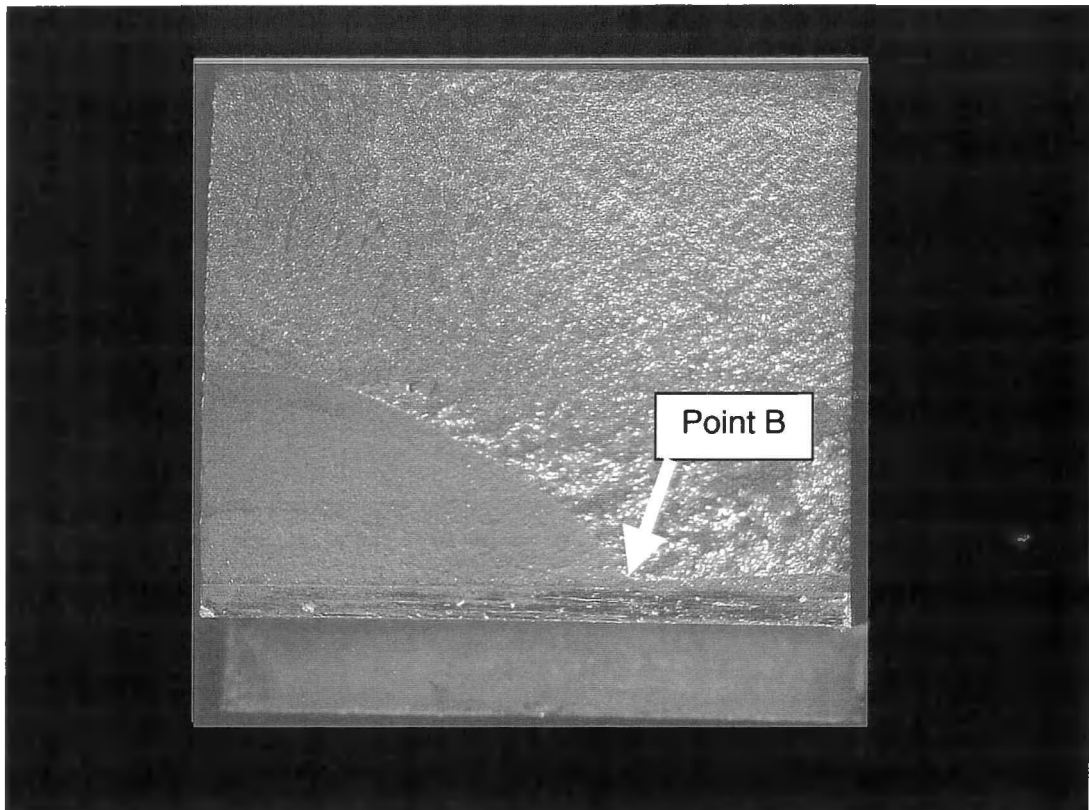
Fracture surface of unirradiated sample E97-72, showing extremely irregular fatigue crack growth.
